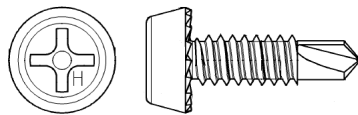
PHILLIPS PAN FRAMING HEAD (PPFH) SCREW
